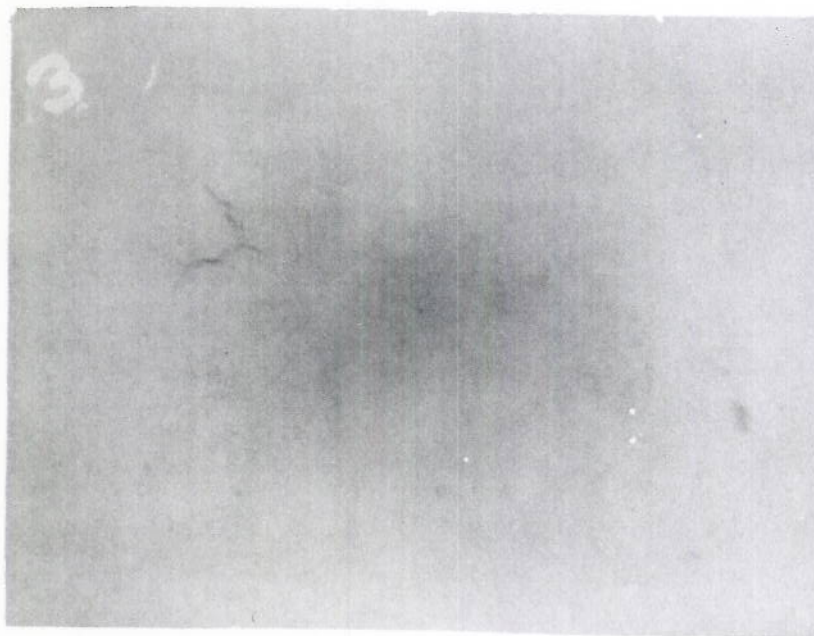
RADIOGRAPH OF CENTER SECTION OF CASTING SHOWN IN FIG. 19.
